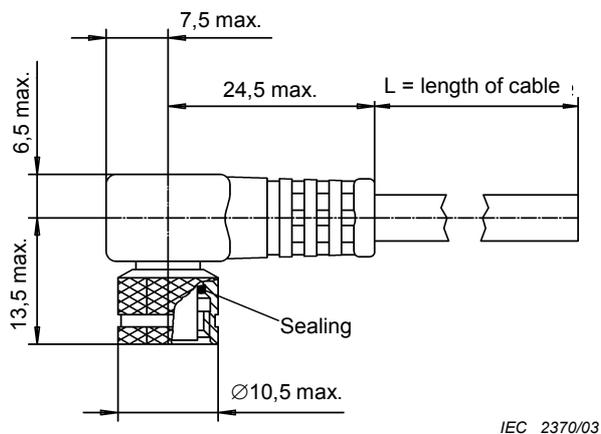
Non-rewireable connector, angled version with locking nut, female contacts
